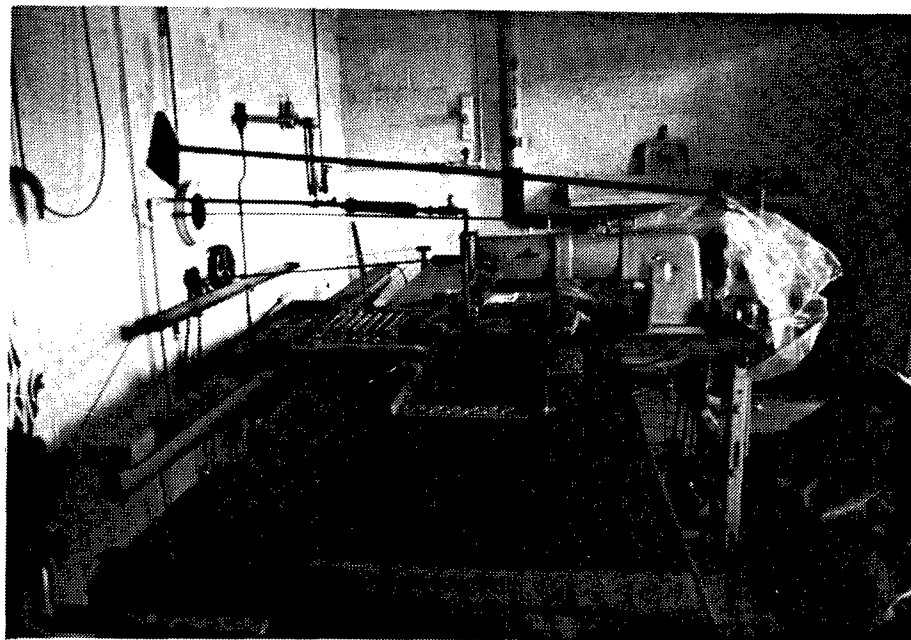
Building 9309-04: Adler sewing machine used to sew together sheets of powder.
